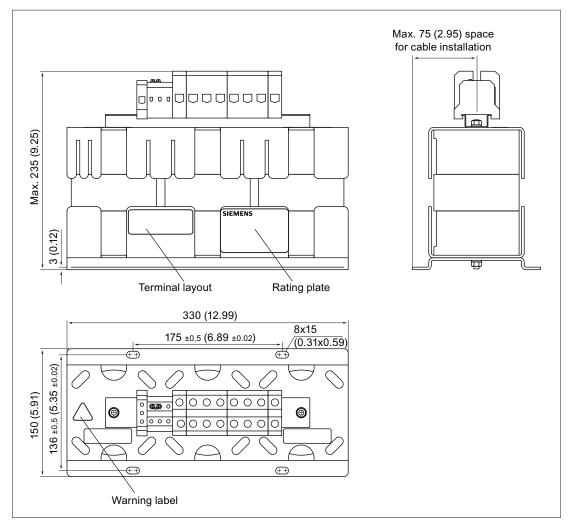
Dimension drawing of HFD line reactor 36 kW, all dimensions in mm and (inches)
